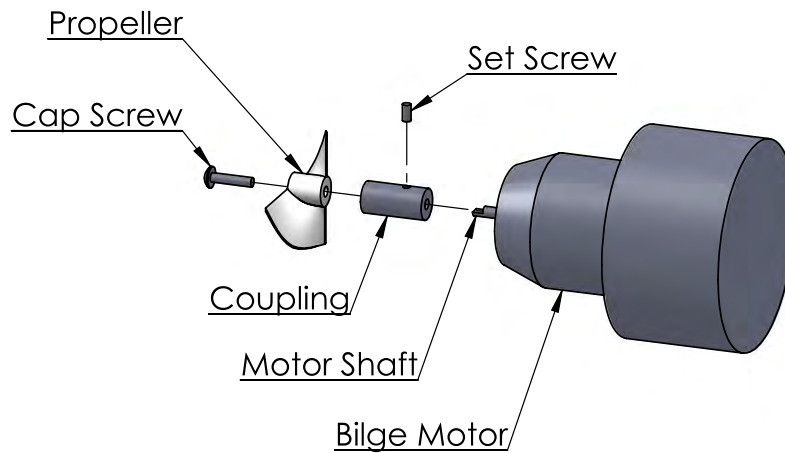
Motor-propeller assembly. The propeller is attached to the motor with a custom coupling. The quantity of the coupling required per raft (8) motivated design for minimum machining steps. The part requires one cutoff operation, two drilling operations, and two tapping operations. Its production was outsourced for the price of three dollars per part for 34 pieces.
